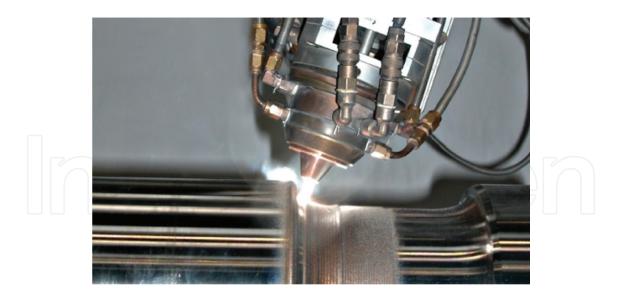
Laser cladding technology of wear-resistant material on shaft surface [18].
